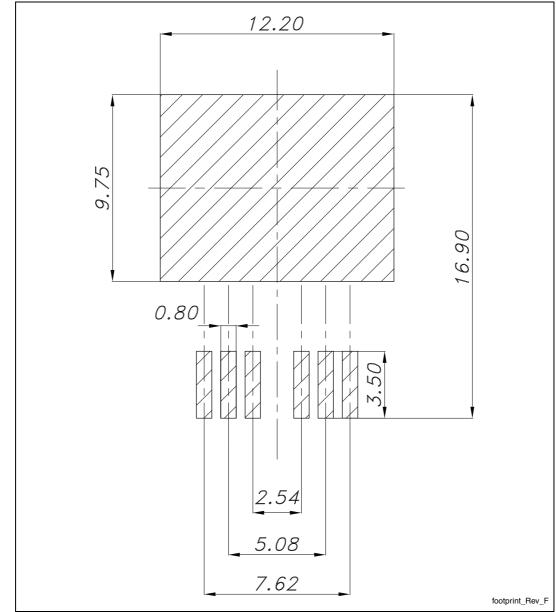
H²PAK-6 recommended footprint (dimensions are in mm)
